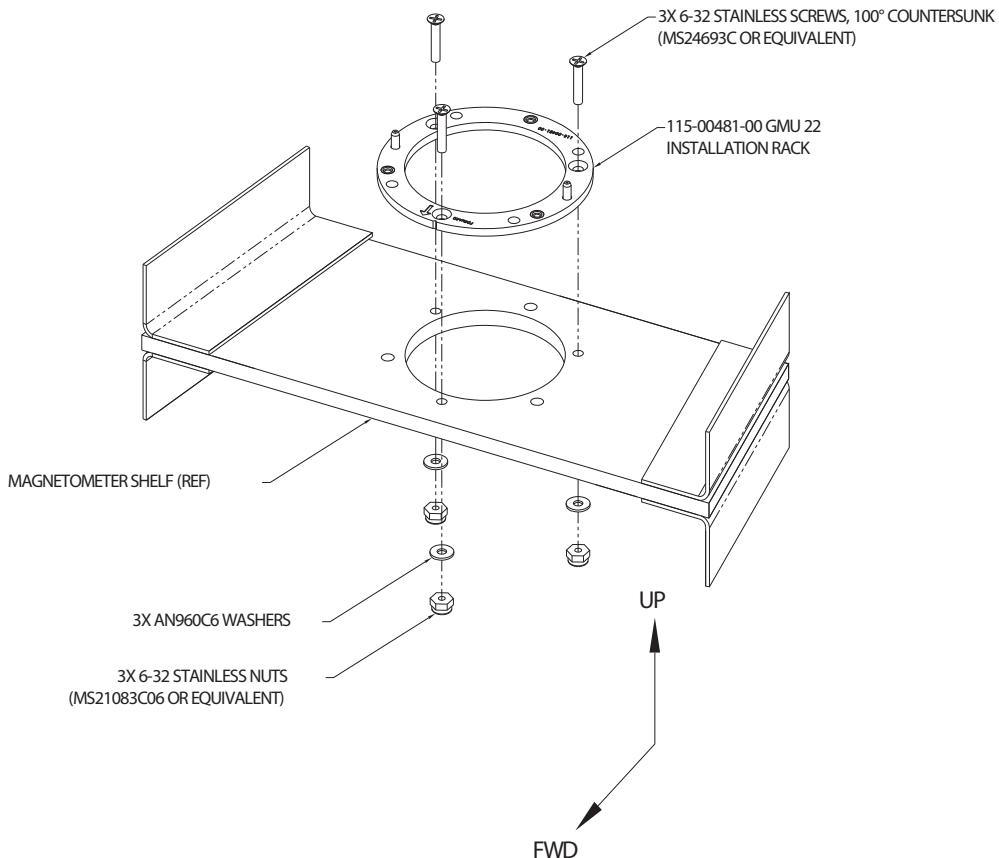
Assembly Of GMU 22 Installation Rack To Magnetometer Shelf
